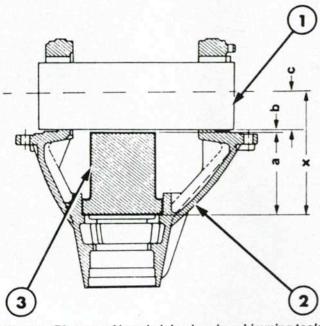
Diagram of bevel pinion bearing shimming tools and measuring points. Refer to text.
